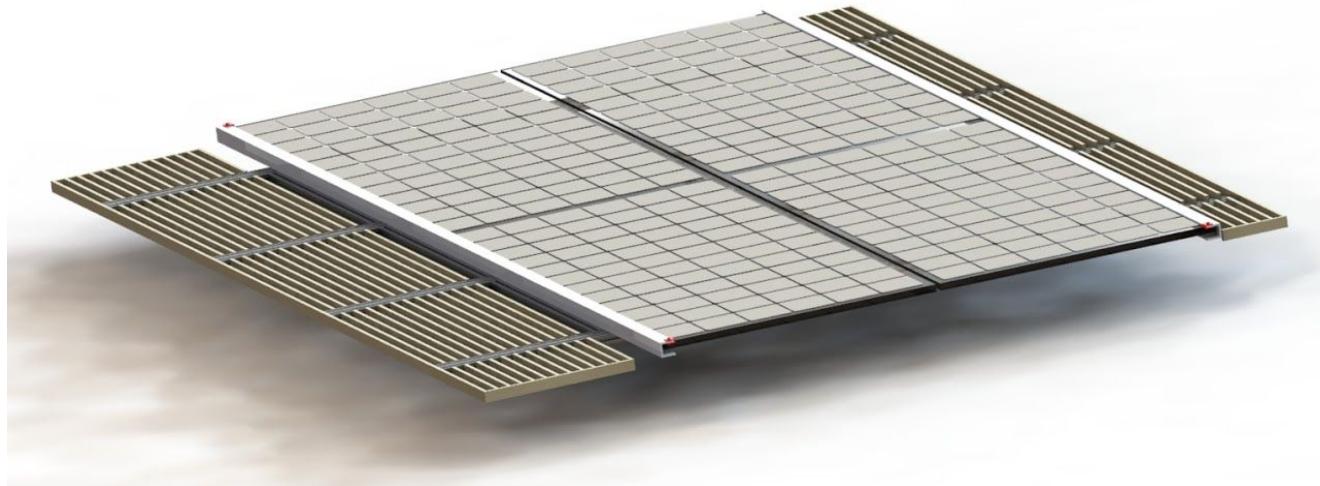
Roof Assembly With New Panel Arrangement and Overhang
